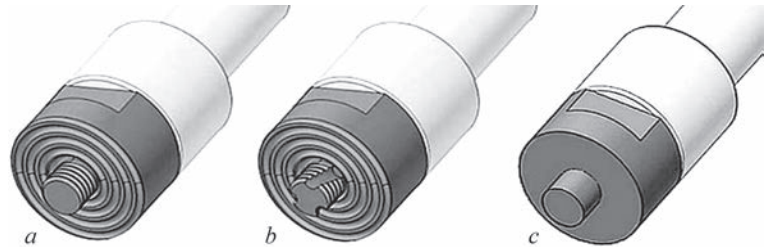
Tools for friction stir welding: a — type C; b — T; c — S
